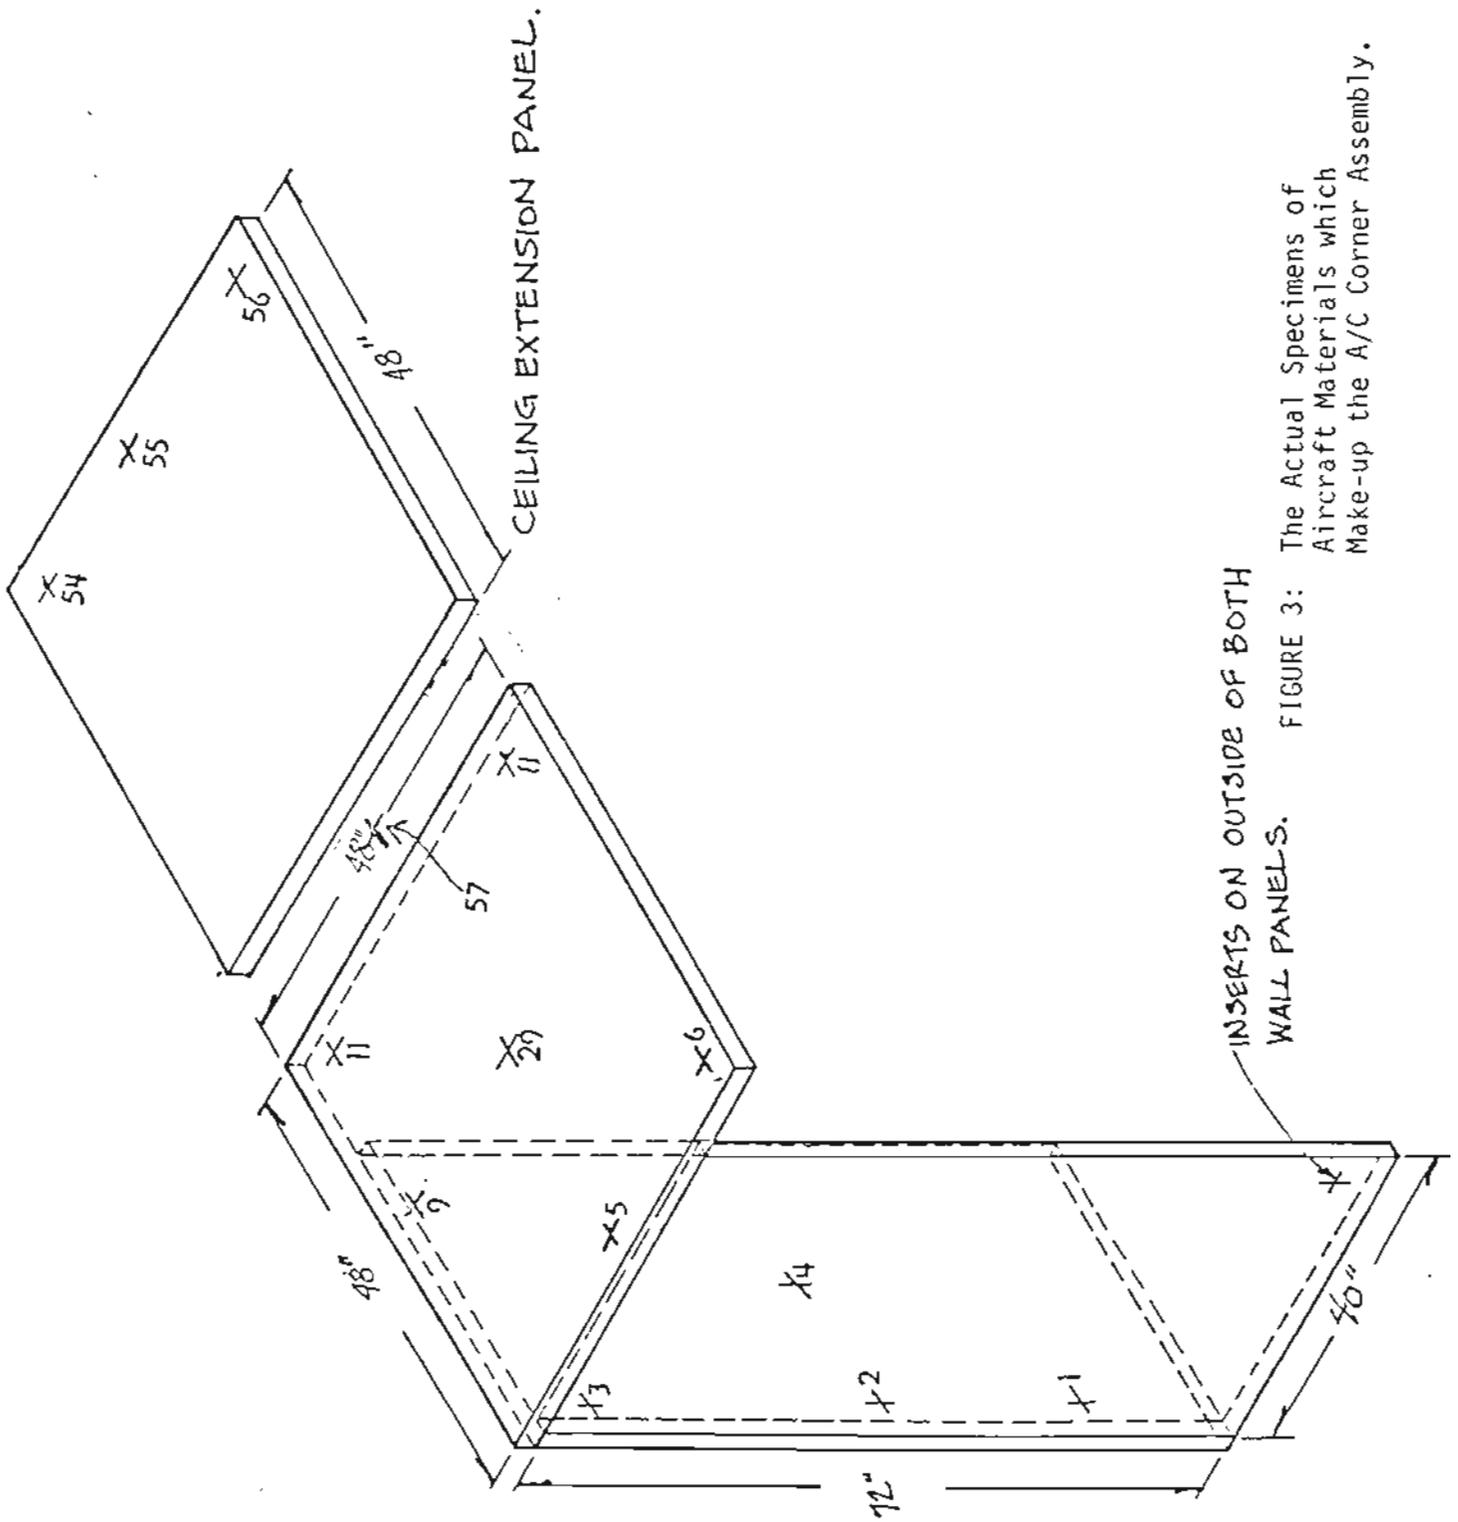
The Actual Specimens of Aircraft Materials which Make-up the A/C Corner Assembly.
